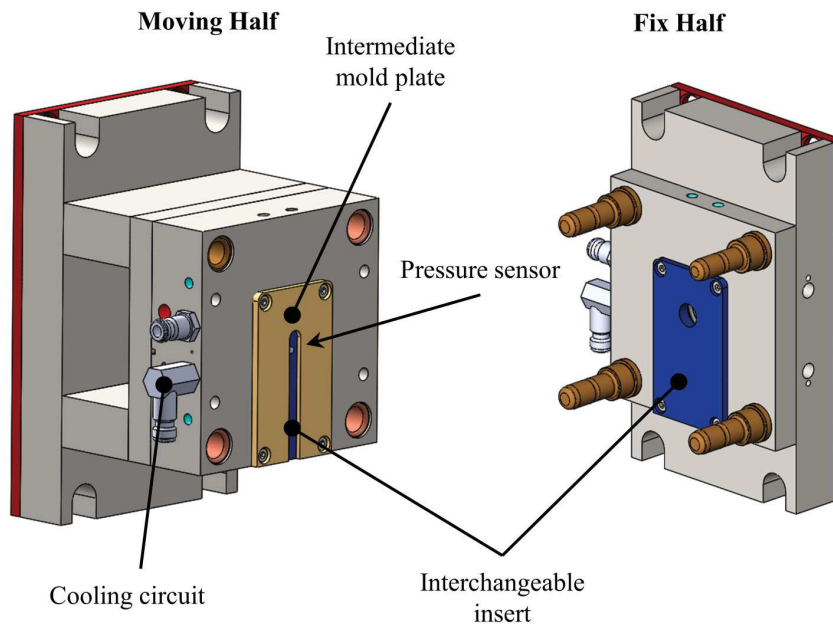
Design of the mold inserts for the moving and fixed halves.
